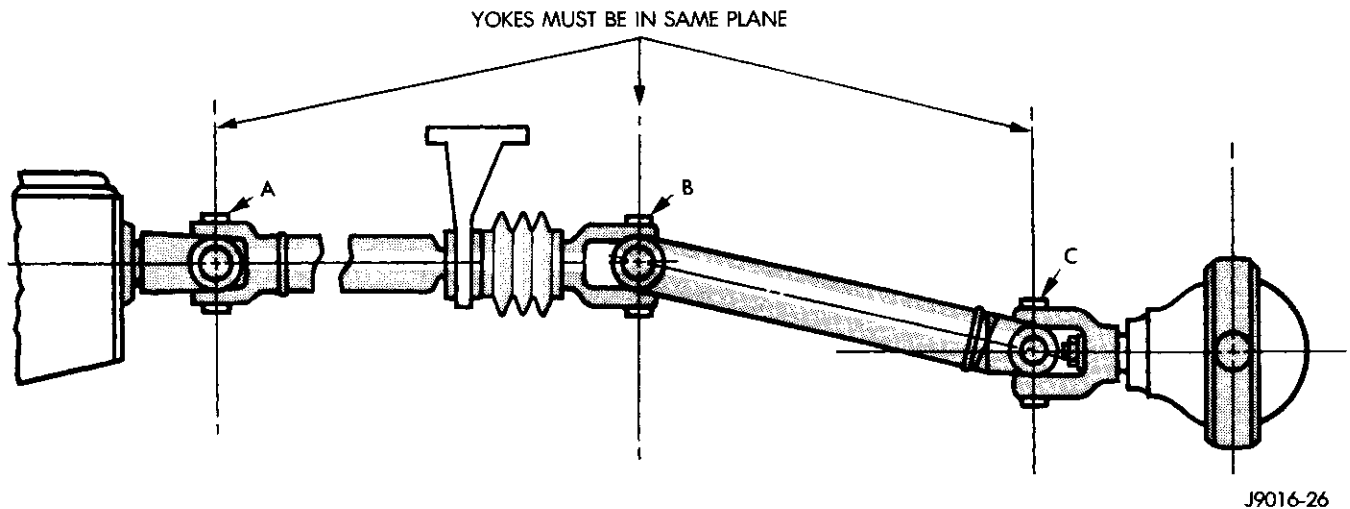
Universal Joint Angle—Two-Piece Shaft
